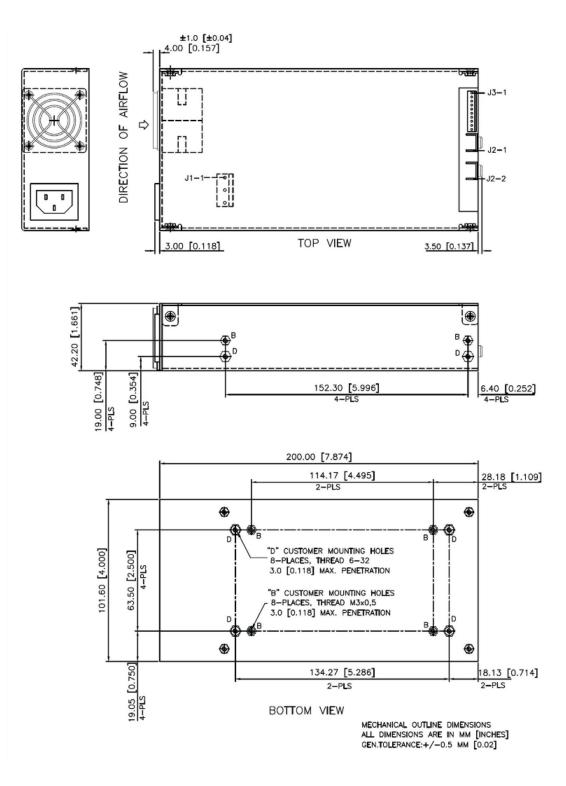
Mechanical Drawing (With Side Fan Mounting)
